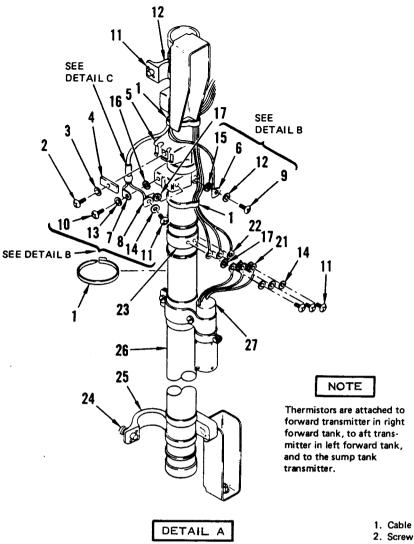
Removal and Installation; Fuselage Fuel Tank Transmitter (Sheet 1 of 3)
